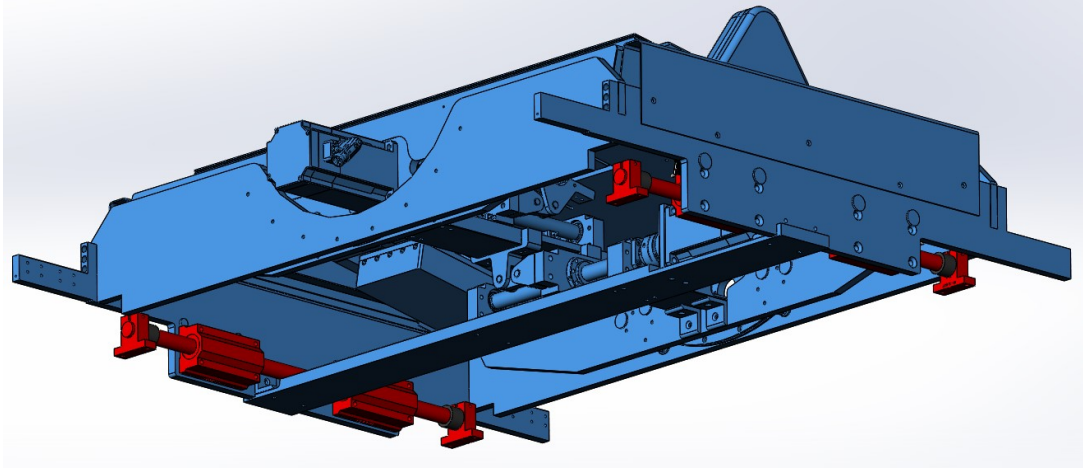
ML Subassembly Interface with Translating Subassembly
